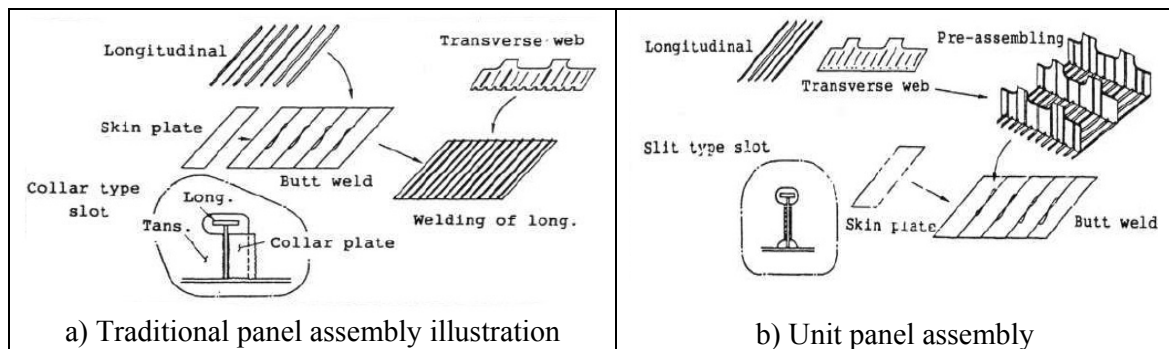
Unit panel and slot construction—automatic placement and welding of longitudinals [4]
